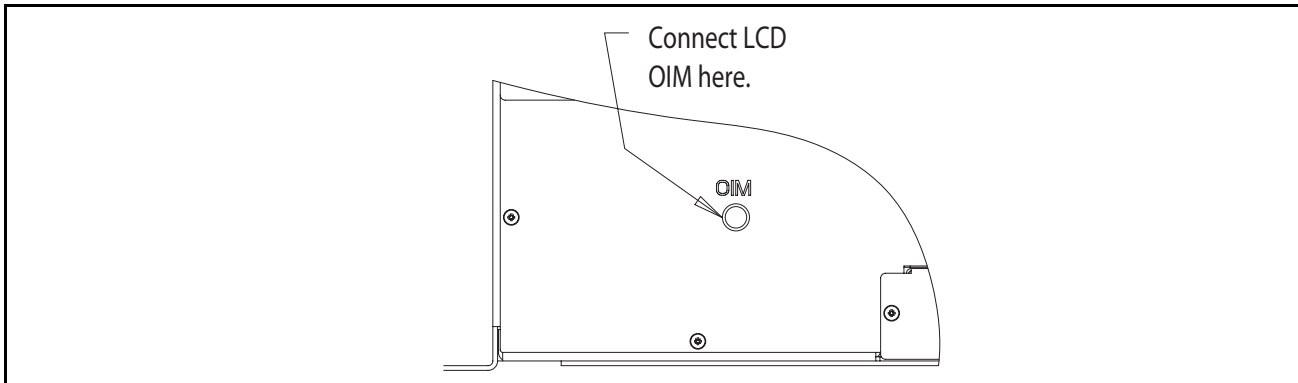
Power Module Bottom Left Front View (Frame 4)
